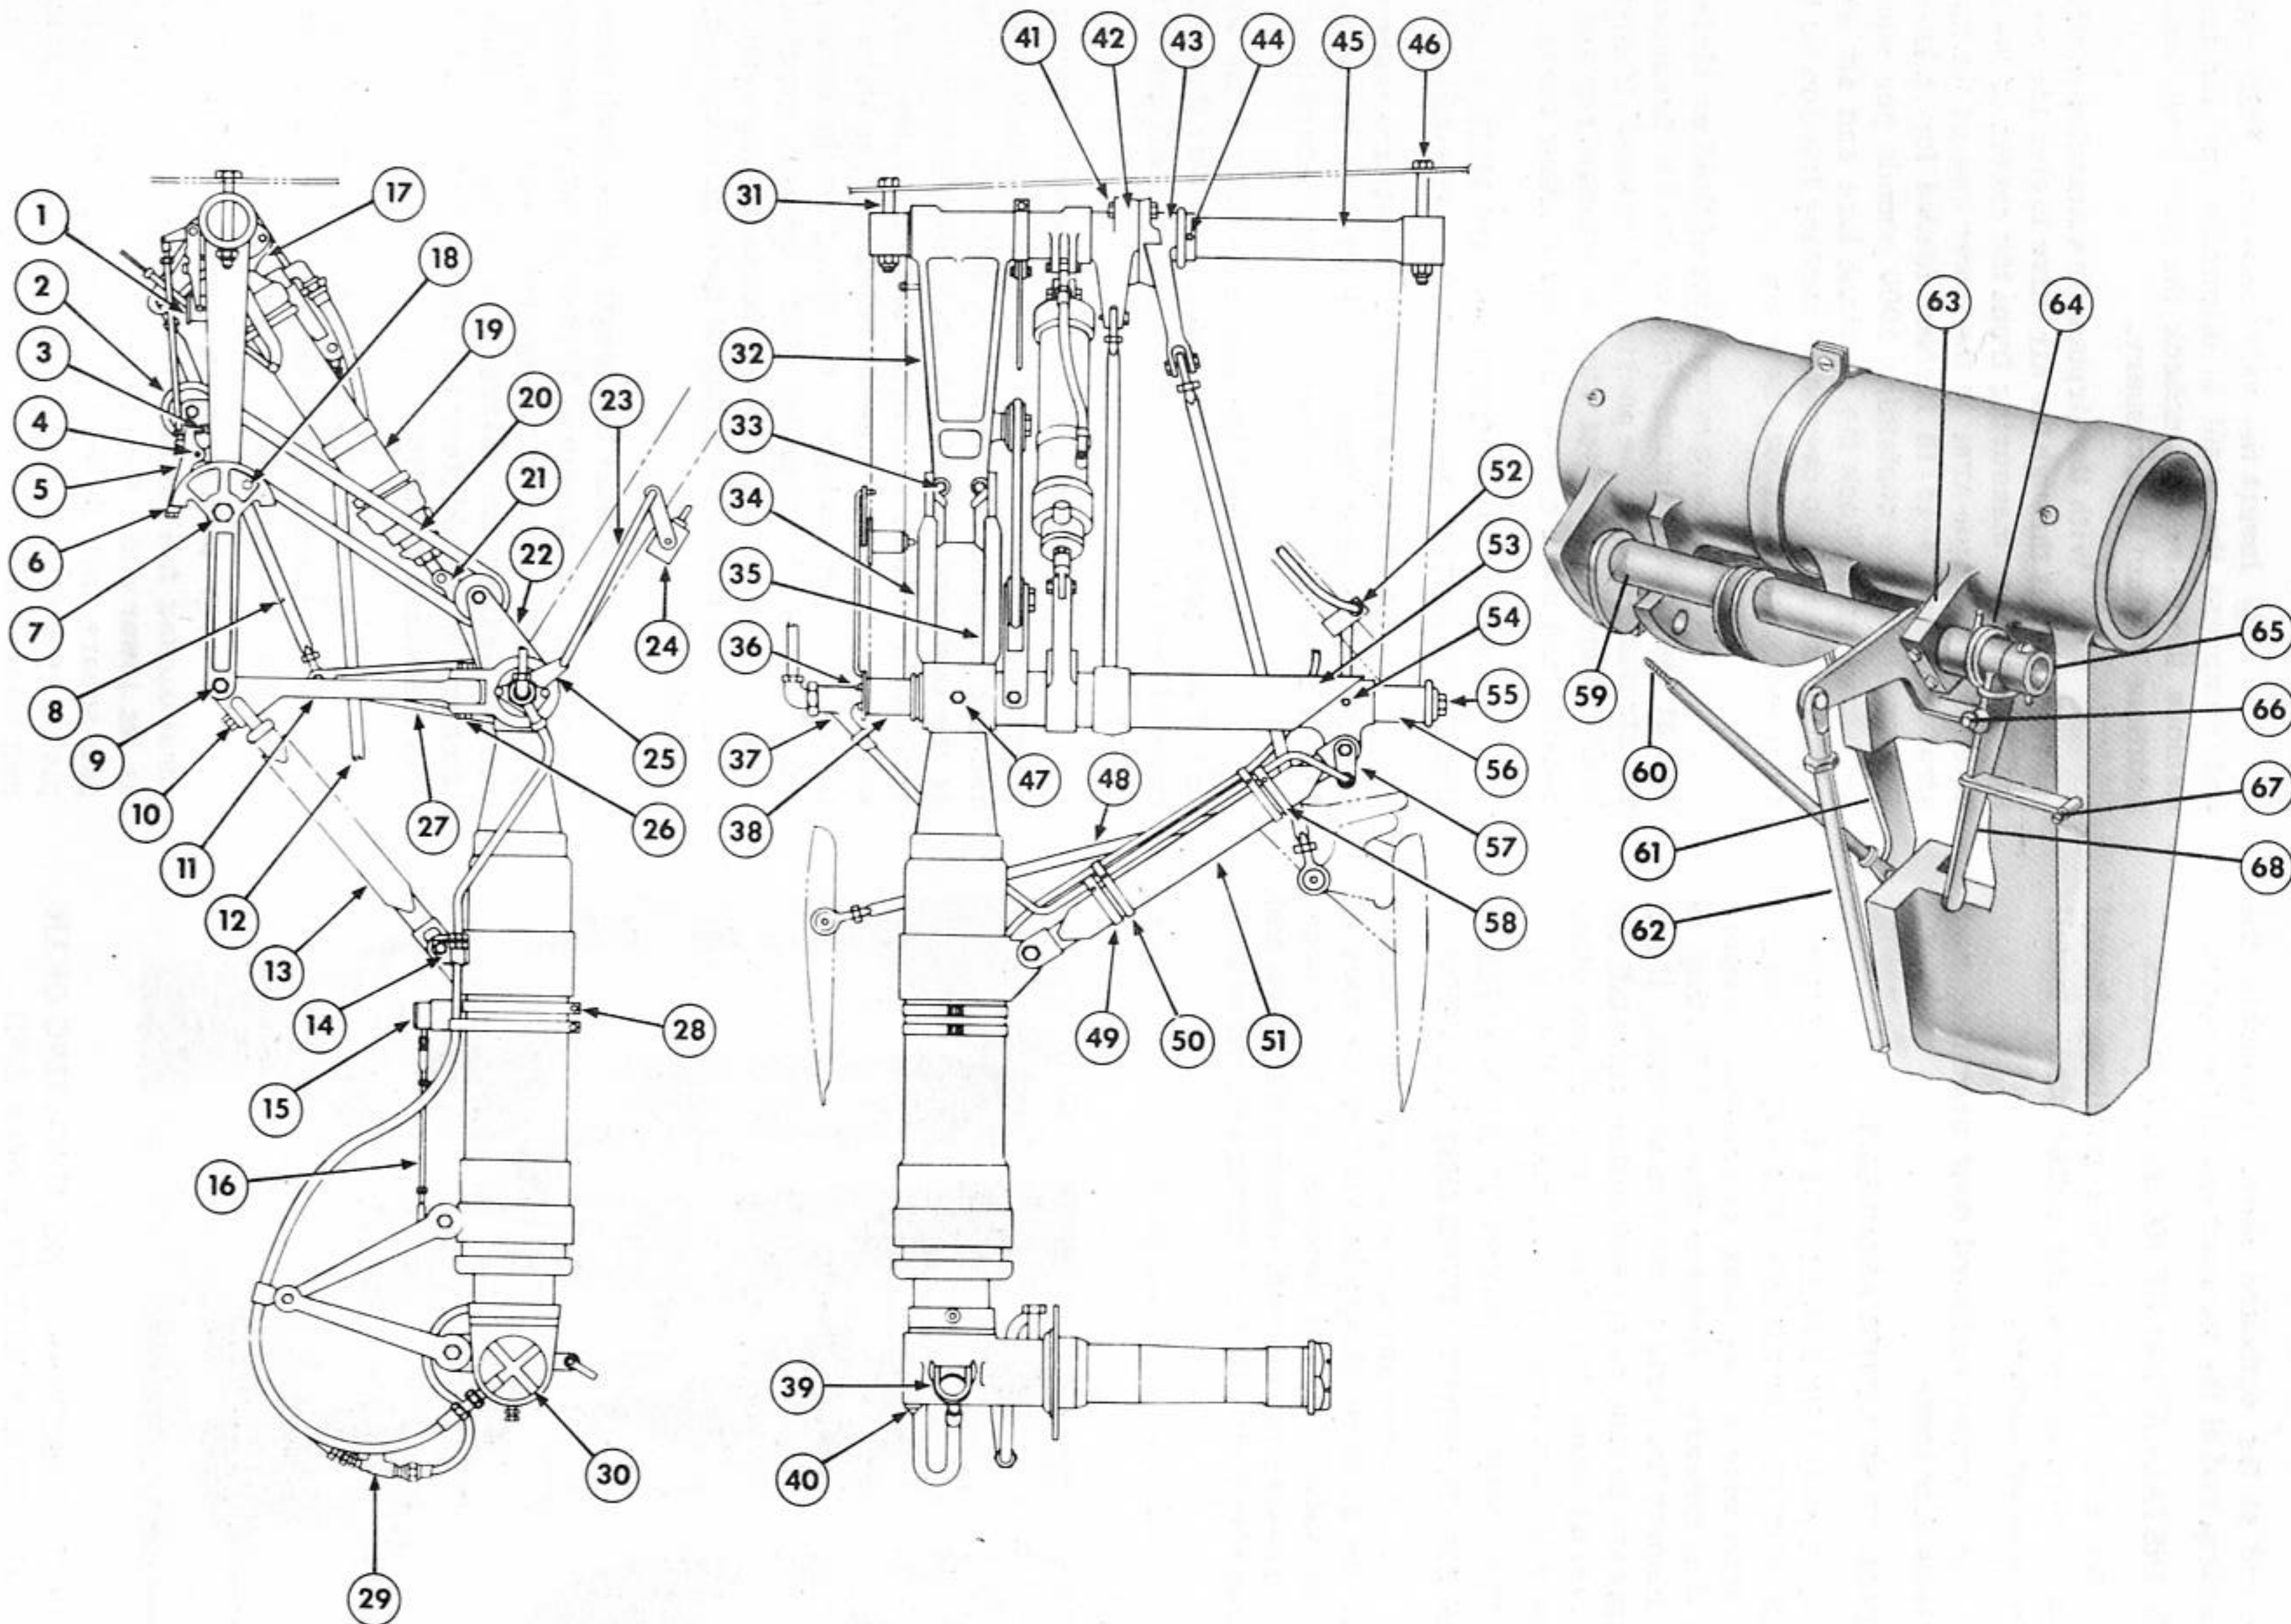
MAIN ALIGHTING GEAR ASSEMBLY AND INSTALLATION
